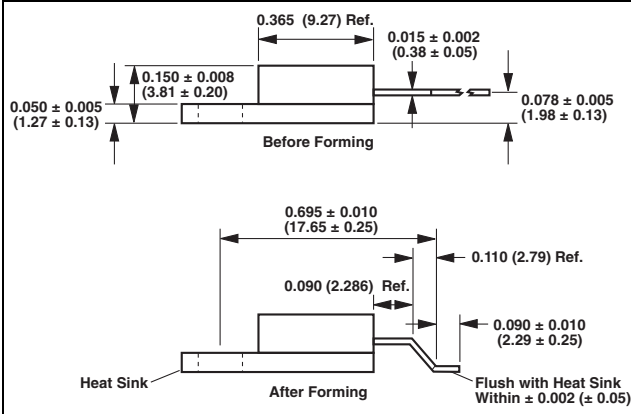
VPR221SZ DIMENSIONS in inches (millimeters)
